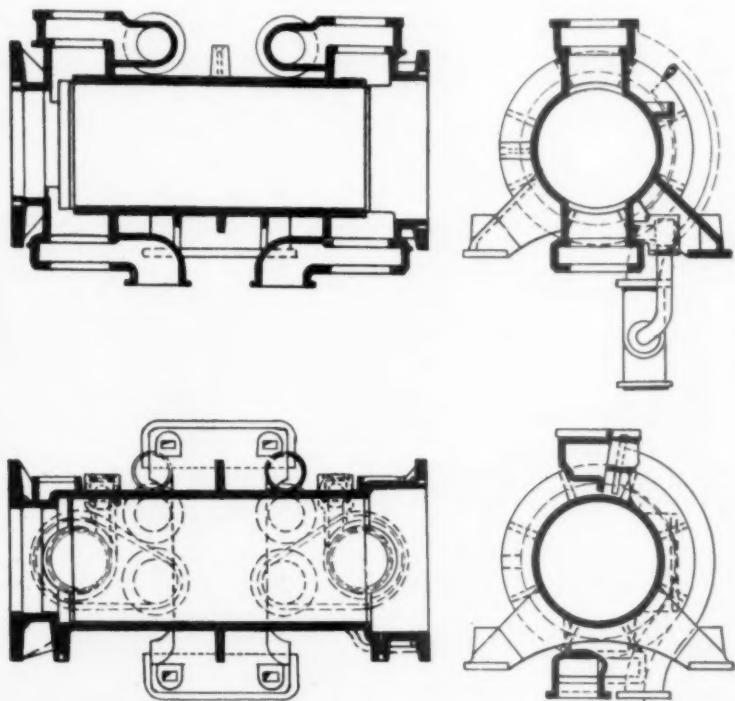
CYLINDER FOR HIGHLY SUPERHEATED STEAM
